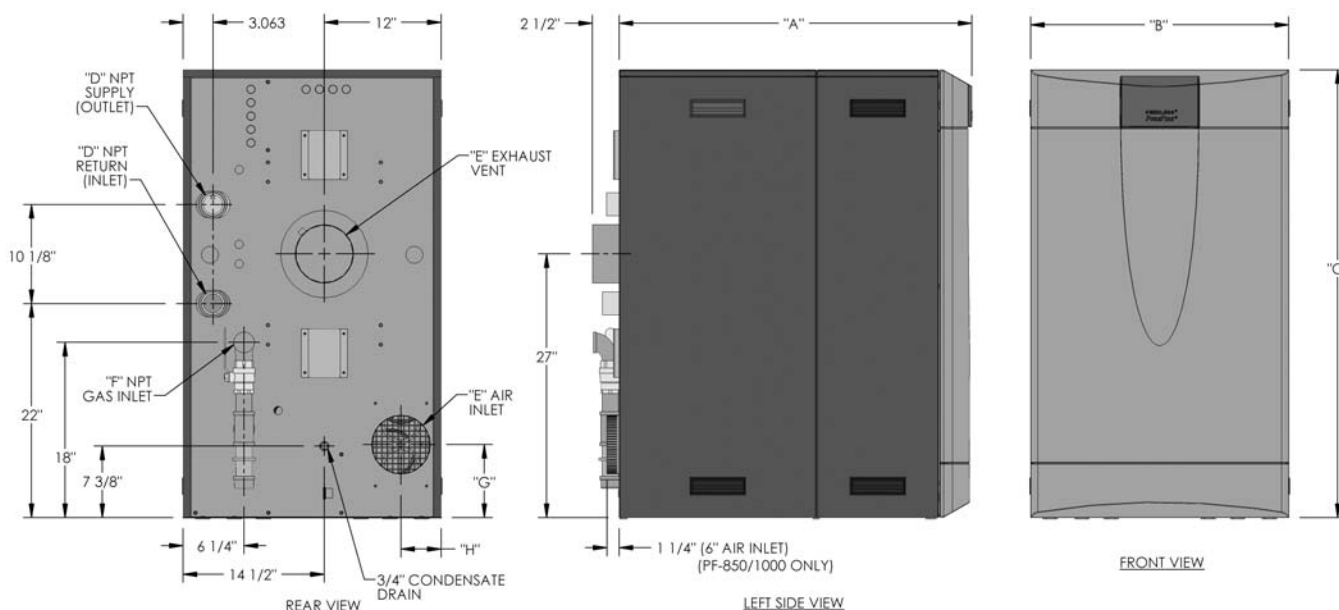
Dimensional Drawing – PF-850, PF-1000 & PF-1500
